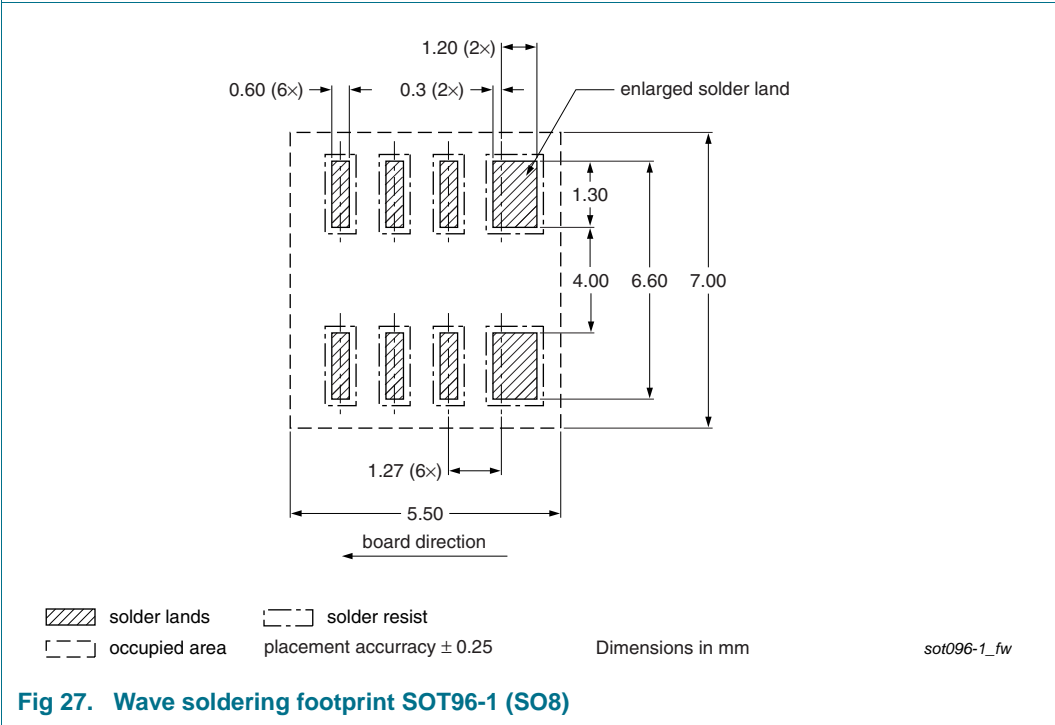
Wave soldering footprint SOT96-1 (SO8)
